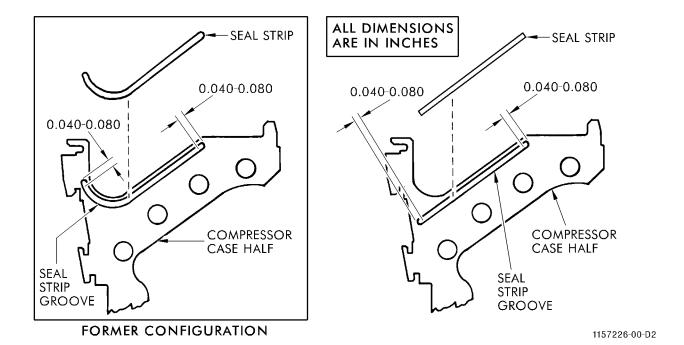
Seal Strip Groove in Compressor Case Splitline Flange
